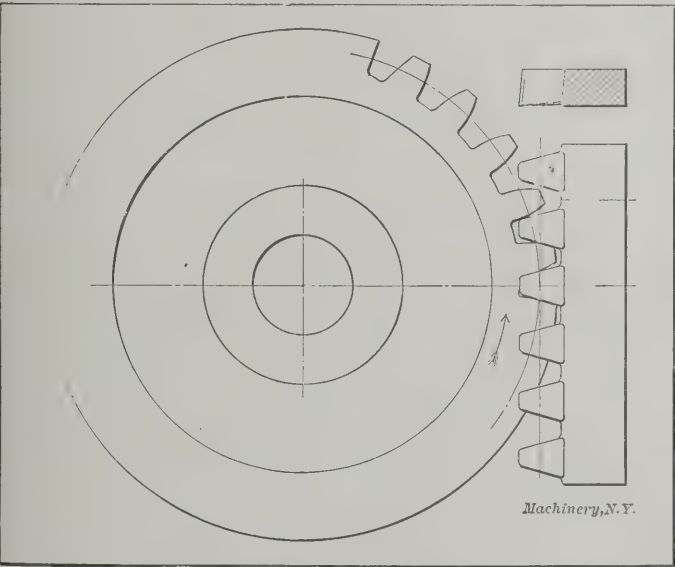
Diagram Showing Action of Rack-cutter in the Sunderland Gear-cutting Machine
